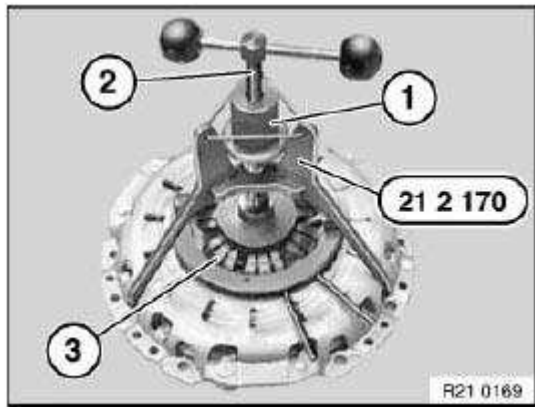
Special Tool 21 2 170, Spindle And Diaphragm Spring
